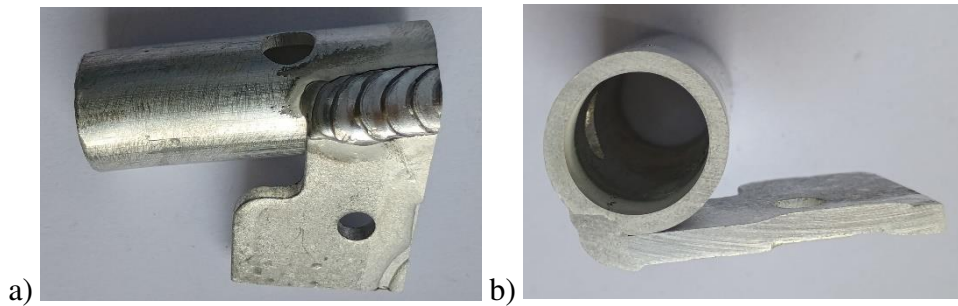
Pipe-to-sheet metal connection using the MIG method: a) weld face, b) joint cross-section.
